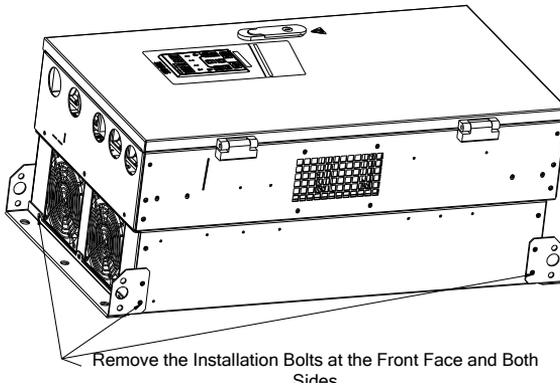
Disassemble the Top and Bottom Mounting Holes
